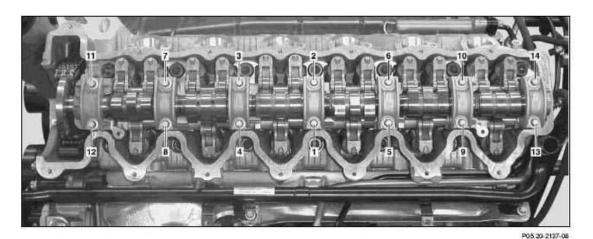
Identifying Camshaft Bearing Caps Bolts Tightening Sequence - Left Cylinder Head Courtesy of MERCEDES-BENZ USA
